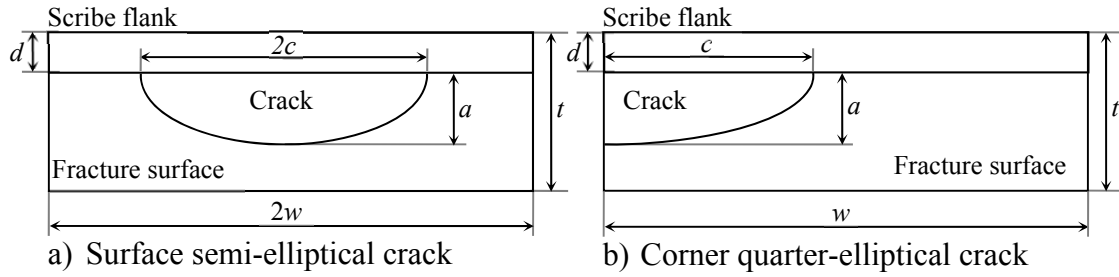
Surface (a) and corner (b) crack dimensions
